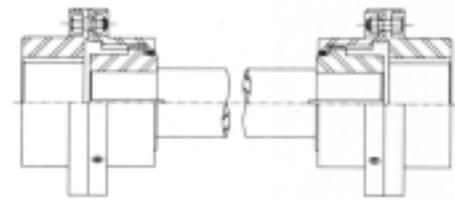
FIG. A TANDEM - FLEXIBLE HALVES ON FLOATING SHAFT
